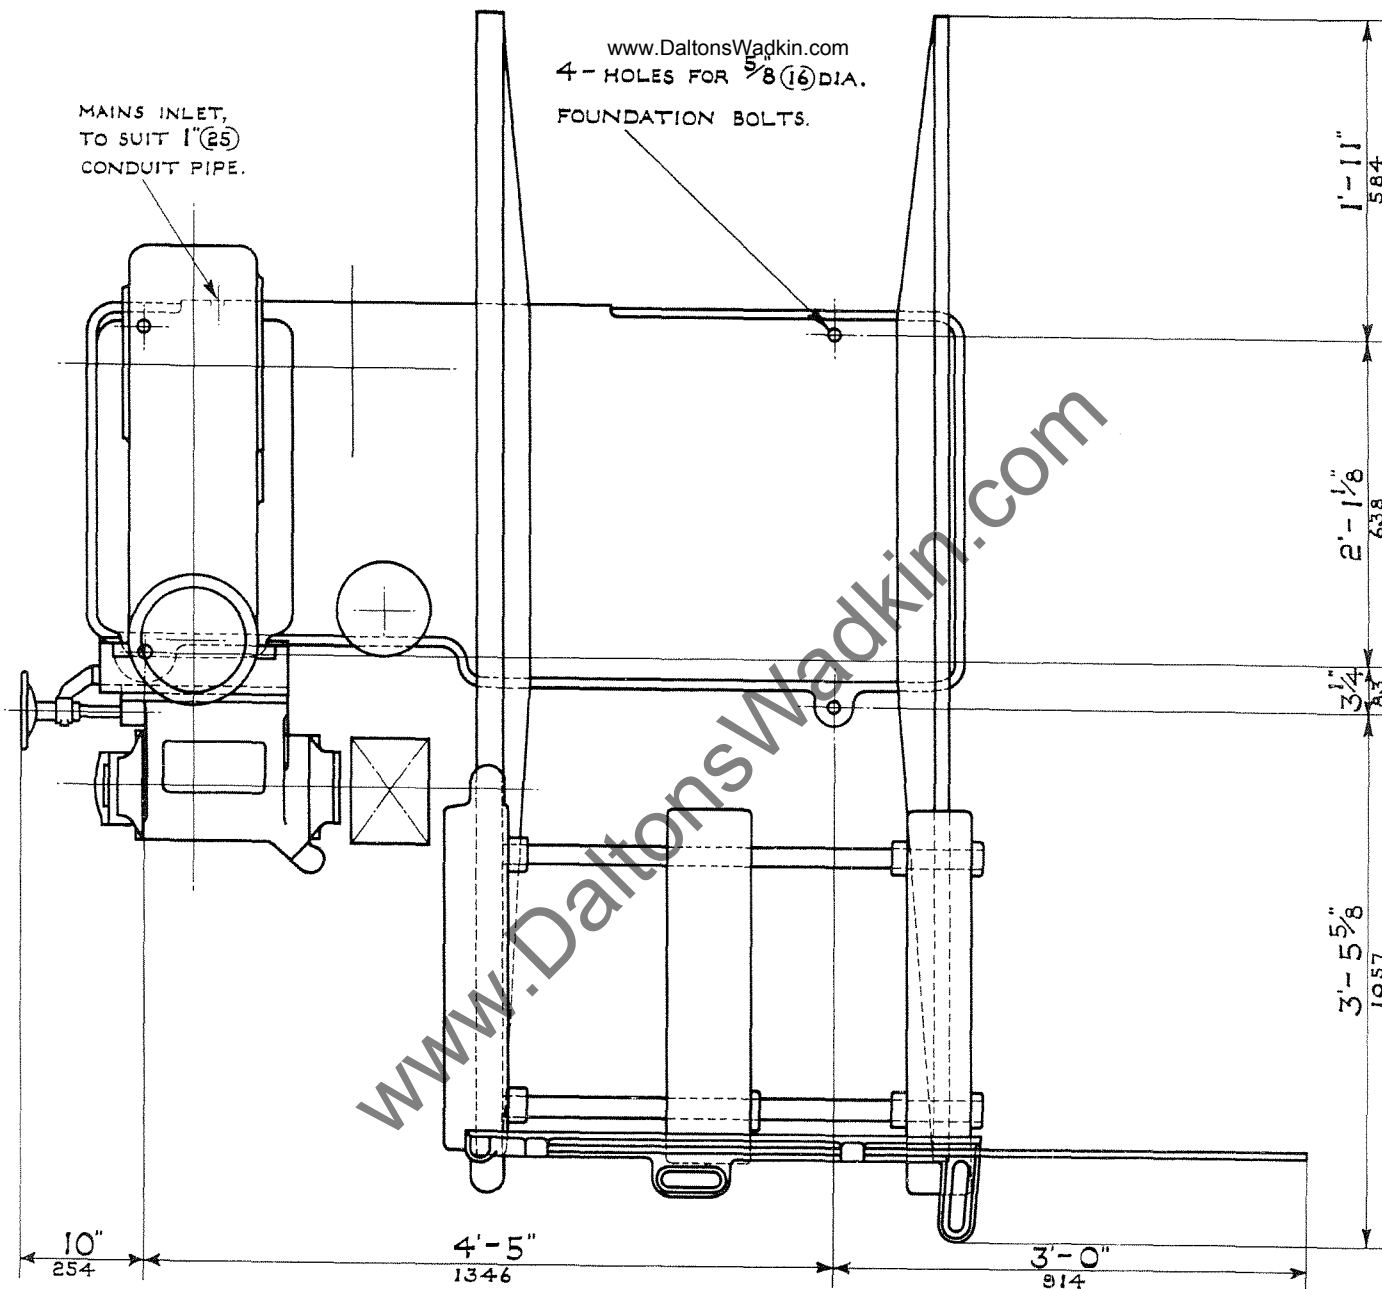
PLAN OF SINGLE END TENONER. TYPE EKA.
